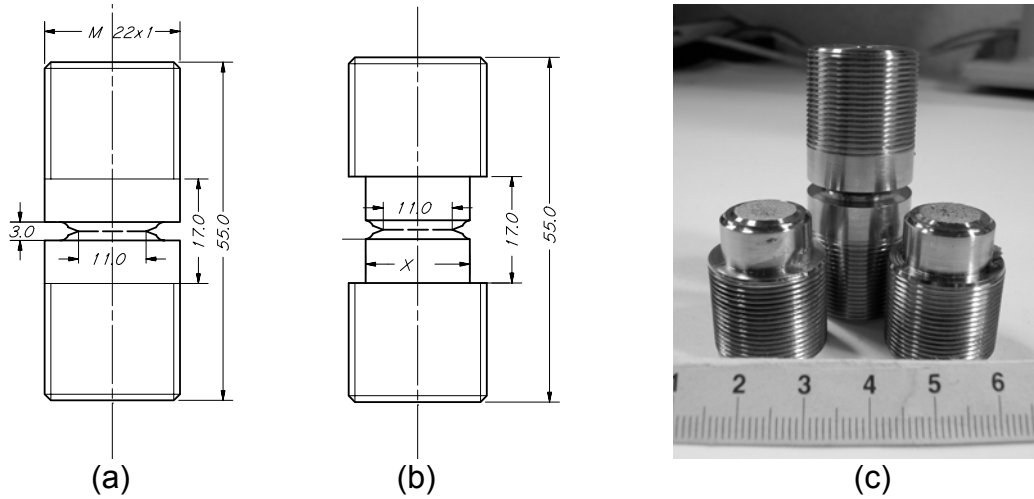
Sketch of the specimens to introduce the fatigue crack (a); to realize different crack depths the effective diameter ( $X$ ) of the fatigue pre-cracked specimens was reduced to values between 22.0 and 10.9 mm (b); (c) shows a specimen for pre-cracking and two halves of a ruptured specimen with a finale sample diameter of 16.6 mm.
